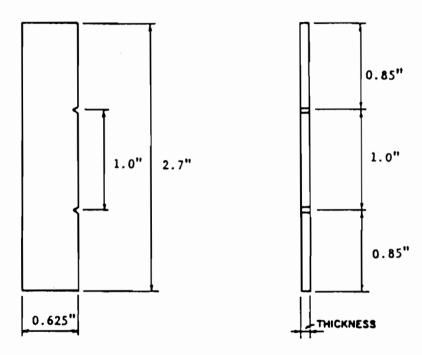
Nominal Dimensions of Compression Coupons Used for 25AK and 50SK Sheet Steels 5
